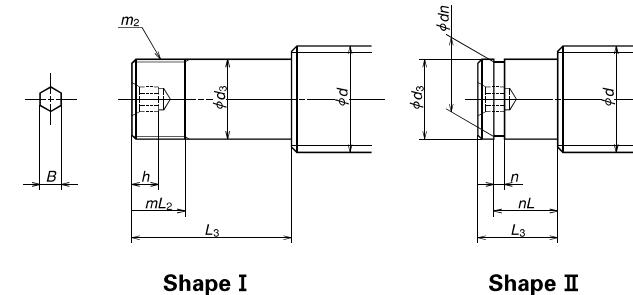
Standard shaft end configuration (opposite to the drive side)
